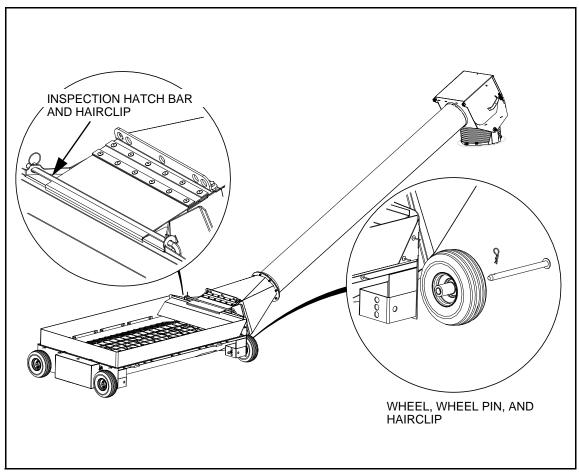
Connecting the Wheels, Inspection Hatch Bar, and Hopper Cable Attach Bracket
